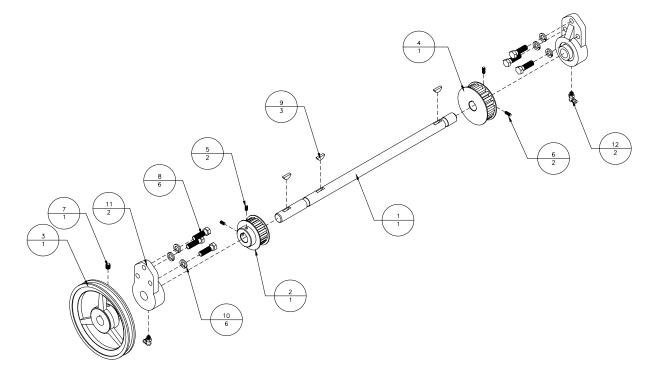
Outfeed Roller Shaft Assembly (100314A)
